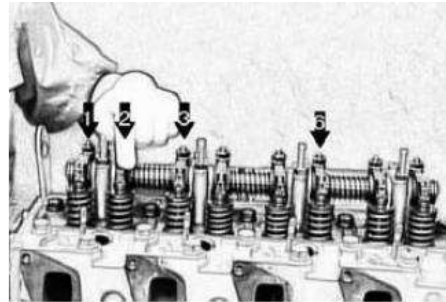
Valve Clearances Adjustment for Four-cylinder Engine
